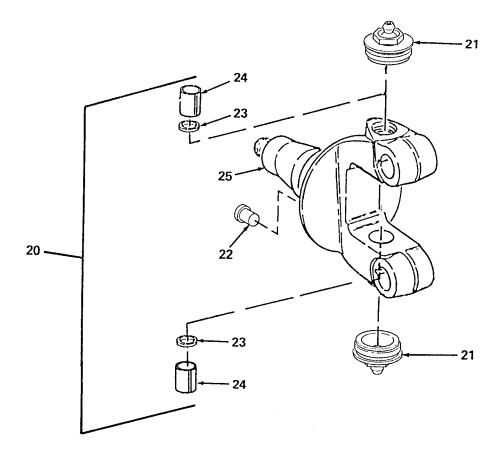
Knuckle and Spindle Assembly (Sheet 2 of 2)
